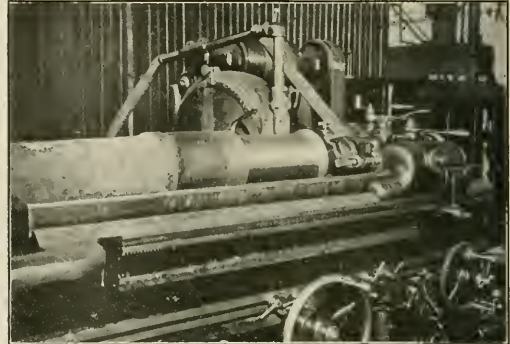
High Power Cylindrical Grinder Truing a Trailer Axle
